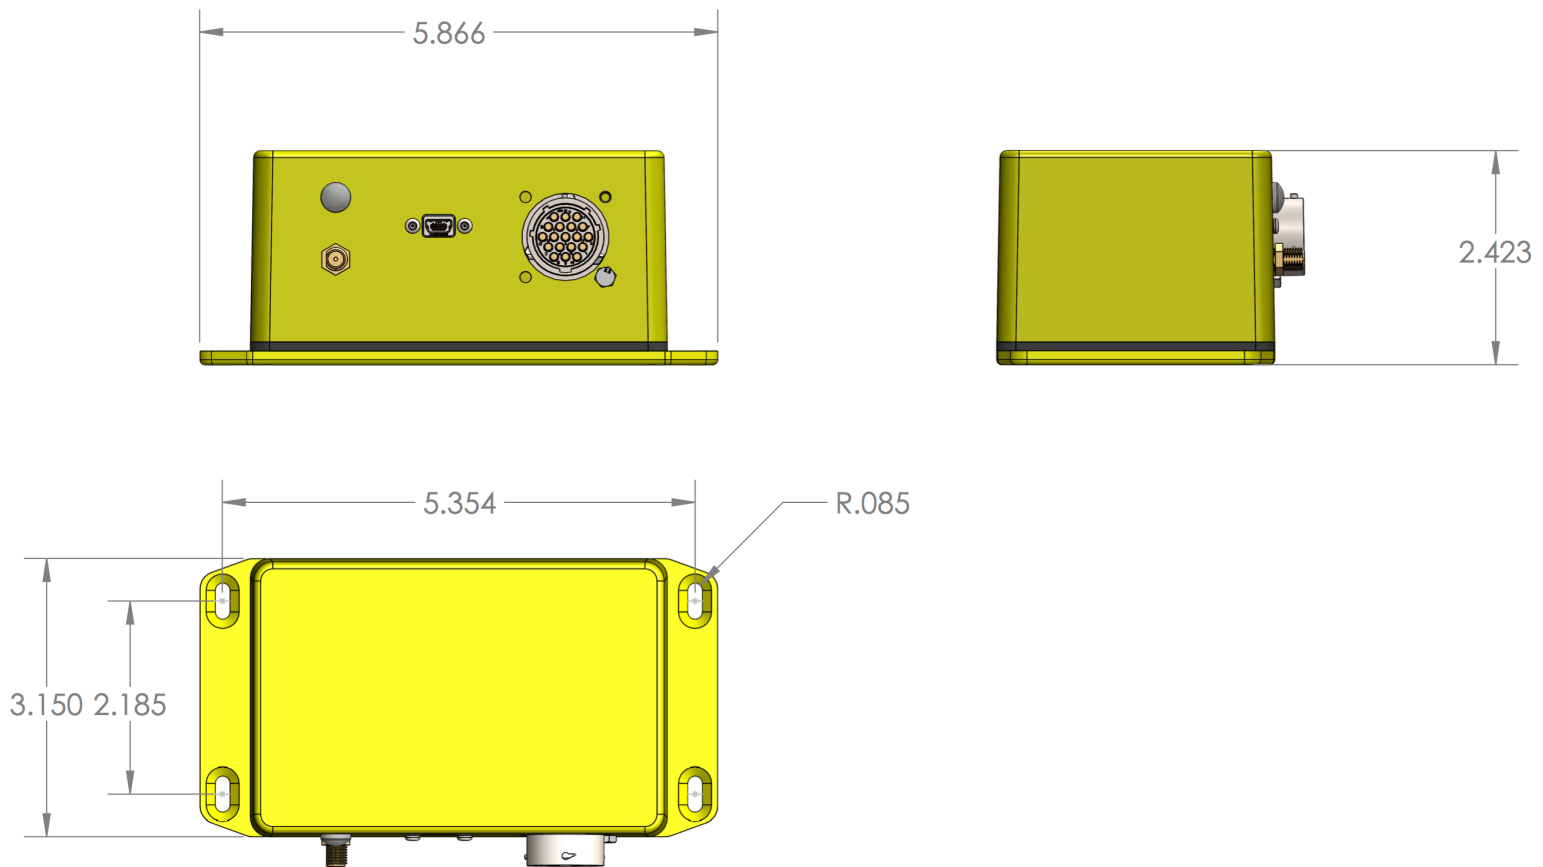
VSC-006 Mechanical Drawing (all dimensions in inches)
